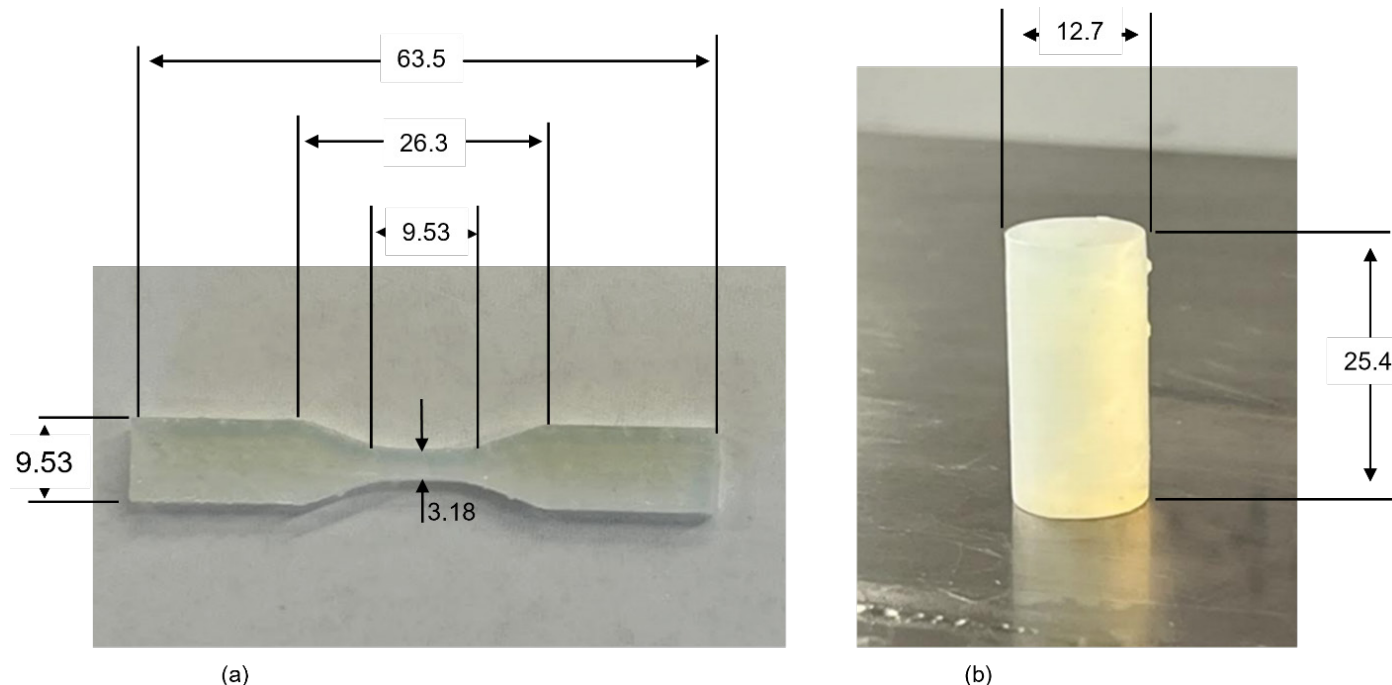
Examples of test specimens used for (a) WPC1 ASTM D638 and (b) WPC1 ASTM D695. Measurements in mm.
